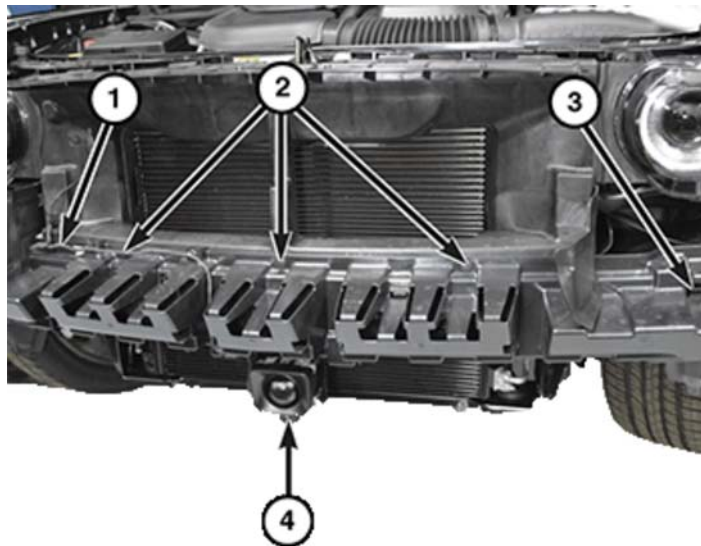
Wire Harness, Connector, Push-Pin Fasteners & Clips
